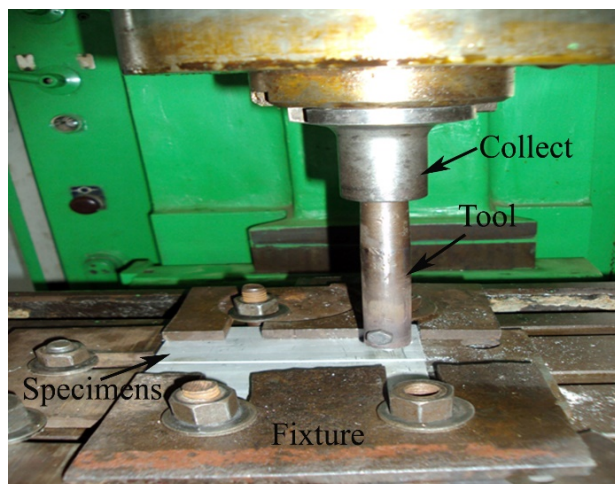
A photograph of the clamping of the samples for friction stir welding.
